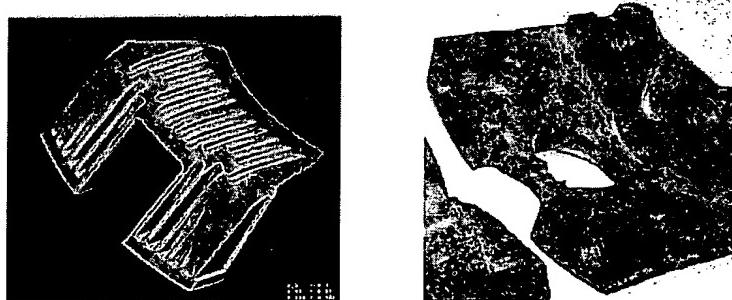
Re-designed brake calliper and the existing one produced in cast iron.
